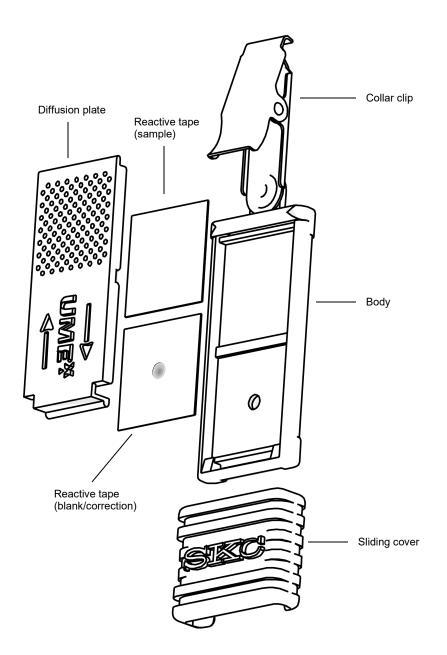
UME^x 100 Passive Sampler (exploded view)
